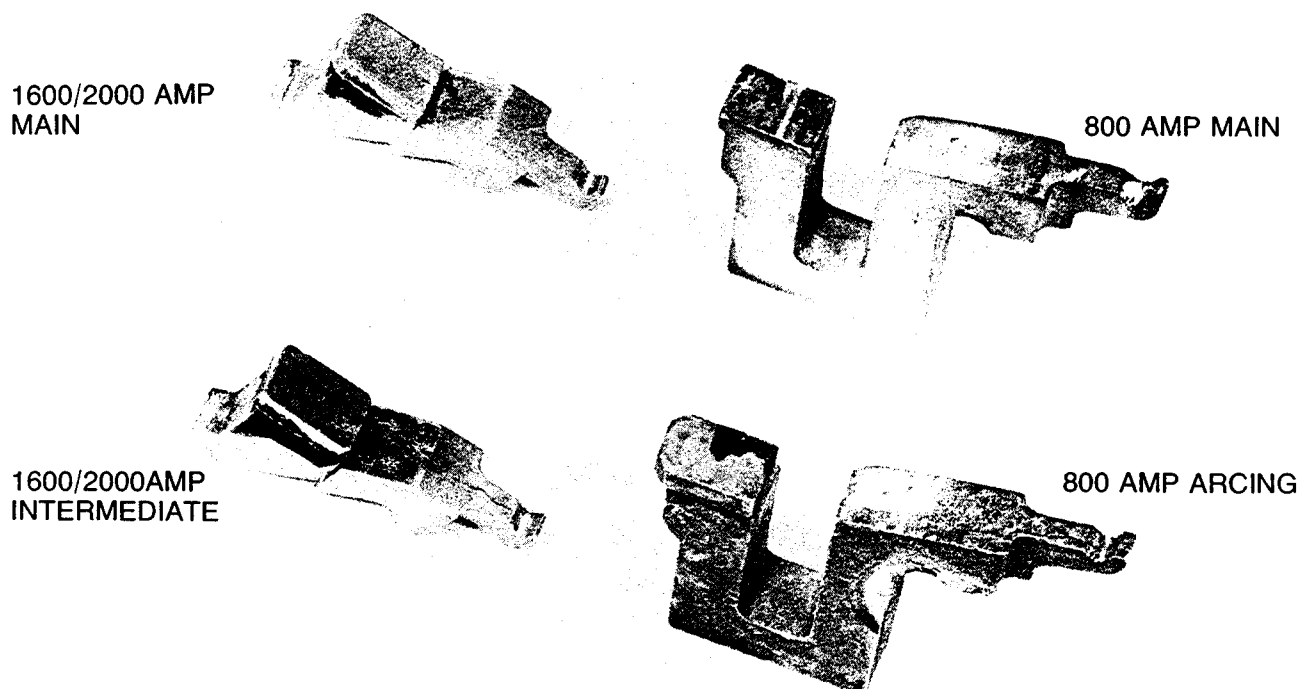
STATIONARY CONTACT CONFIGURATION
